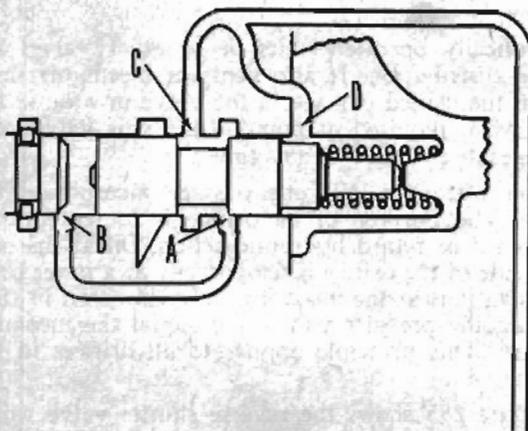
DIRECT SHIFT THROTTLE VALVE
